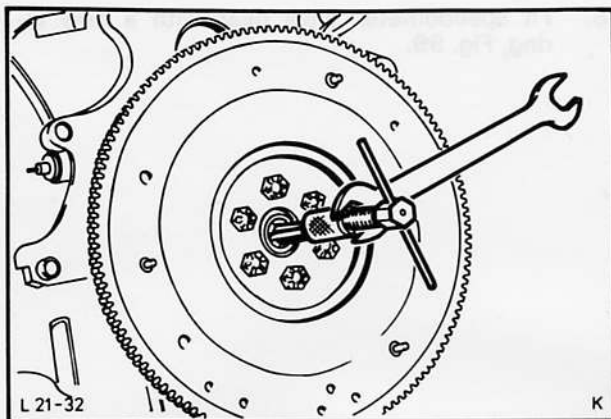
Remove pilot bearing with Special Tool No. 21-036
